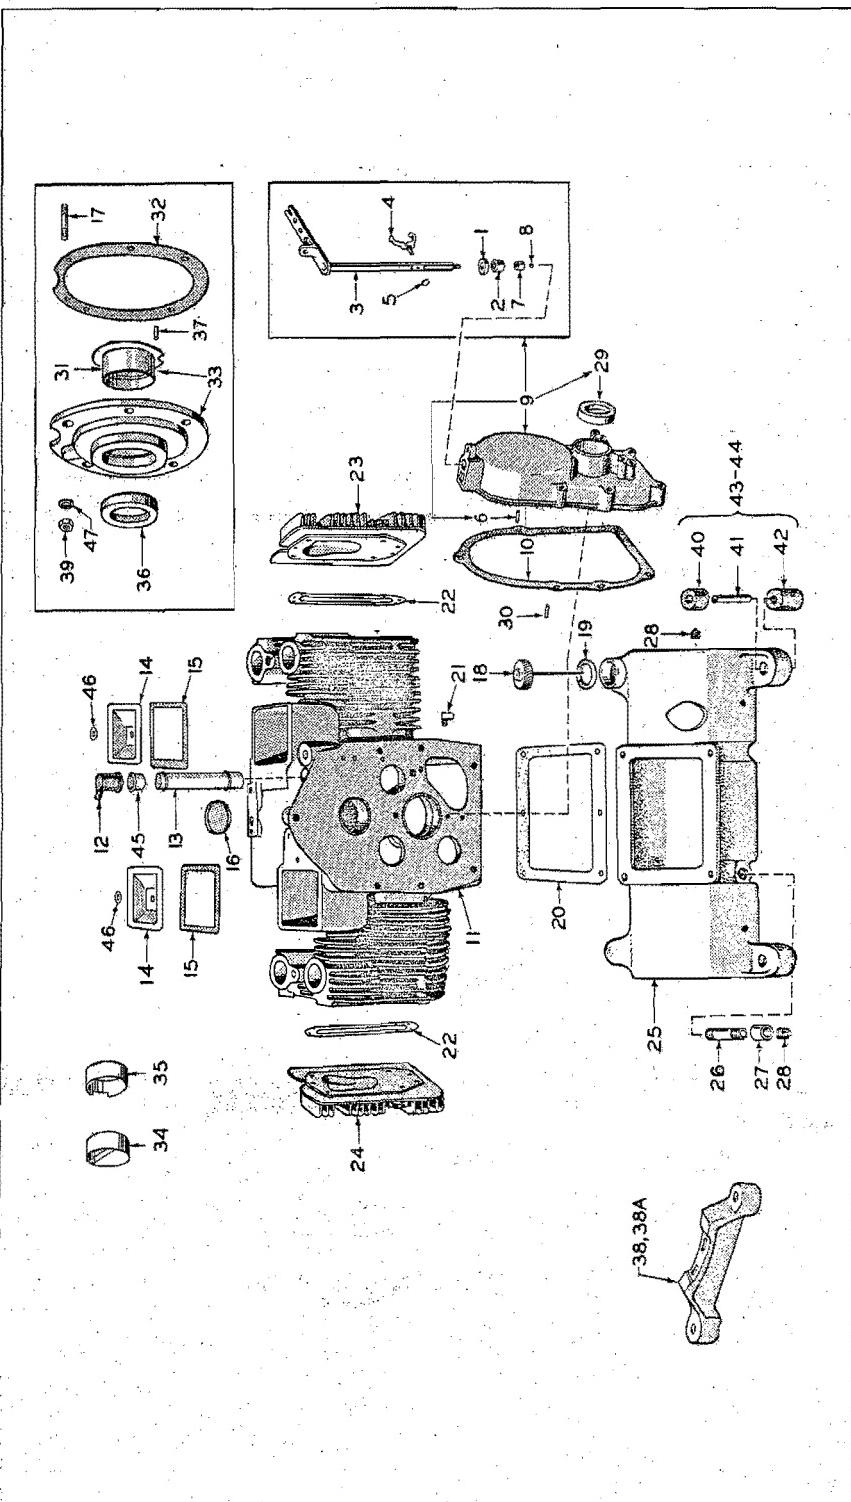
FIG. A - CYLINDER BLOCK, OIL BASE AND GEAR COVER GROUP
